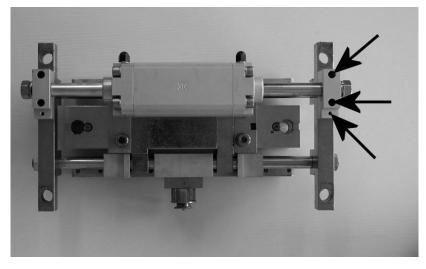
Disconnect the hydraulic damping device from the setting mechanism
